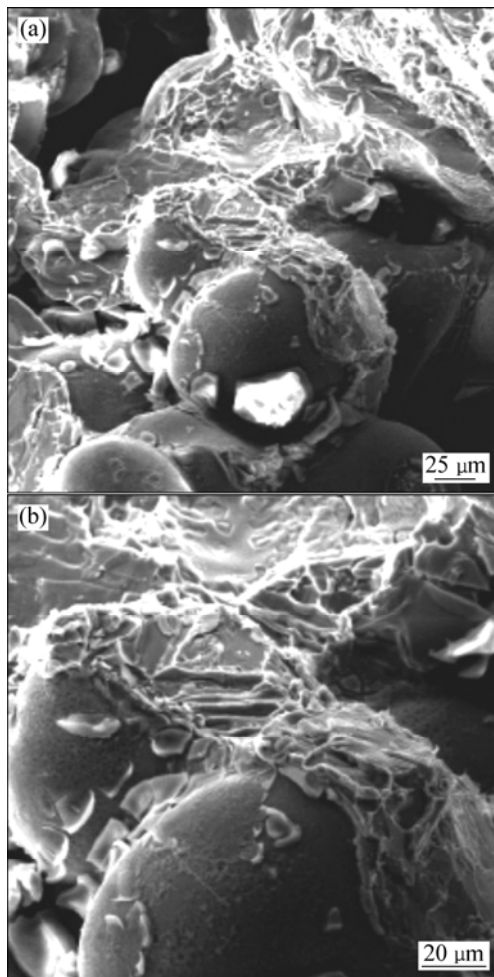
SEM images of fractured surfaces of semi-solid welded specimen (sample 6)
